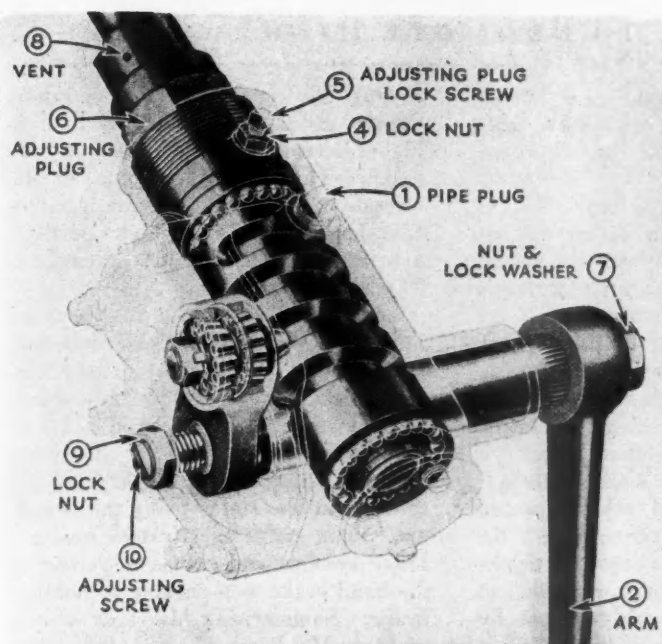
Backlash, which appears as shaft end play is adjusted by screw 10 with gear in mid-position
